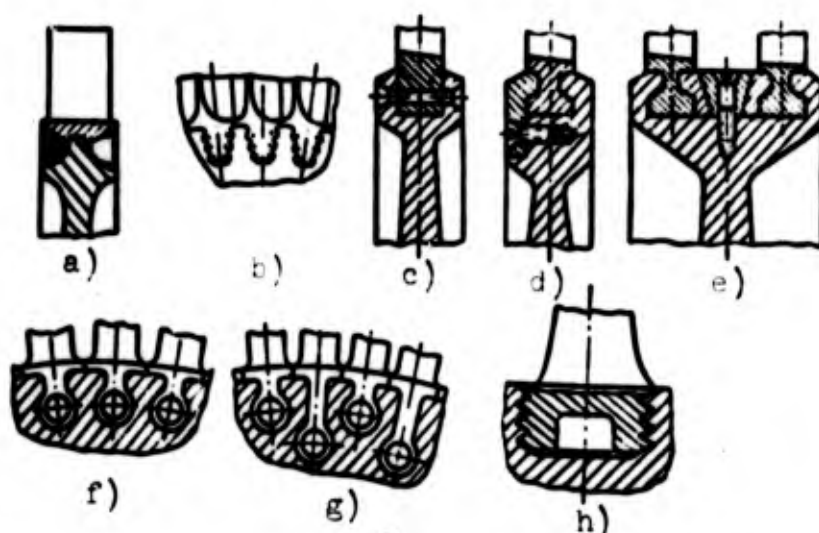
Types of joints of blades with turbine disks: a) a welded joint without lock; b) fir-tree lock; c, d, e) T-shaped locks; f), g) cylindrical locks; h) lock with triangular flanges.
